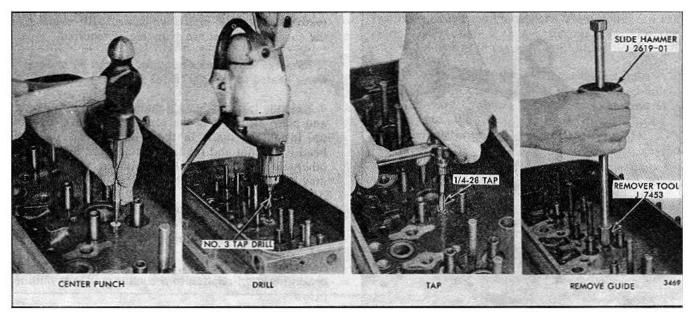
Removing Broken Exhaust Valve Bridge Guide
